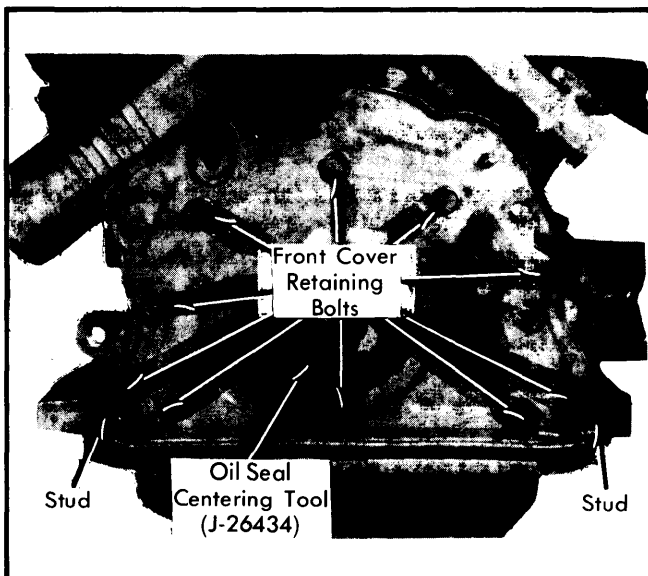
Installing Engine Front Cover With Centering Tool Fitted Through Oil Seal Hole
